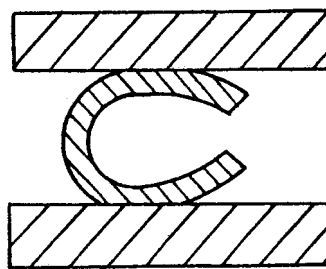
Position of “C” Shape of Test Sample between Two Flat Plates
